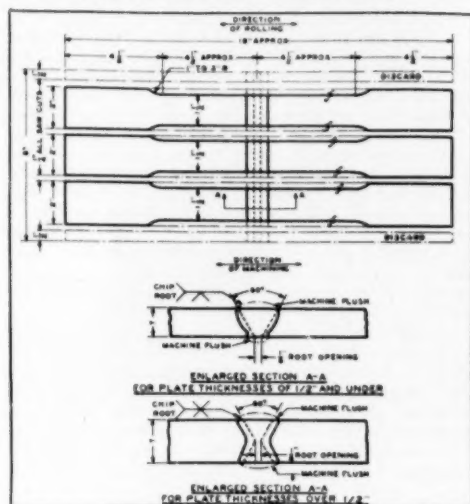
DETAILS OF STANDARD TRANSVERSELY BUTT-WELDED TENSILE SPECIMENS
